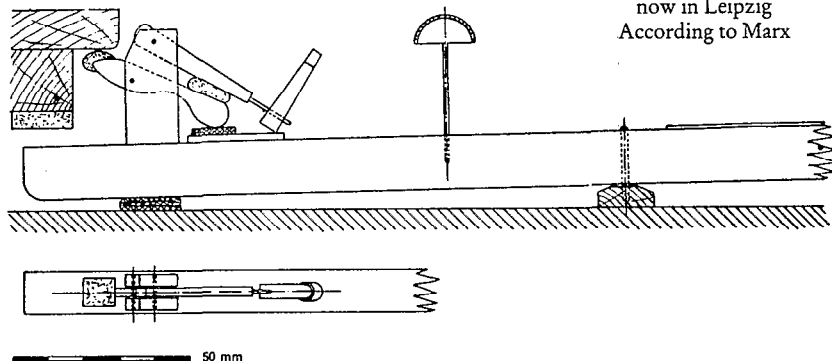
Bumping action with escapement lever, hammer facing away from player
